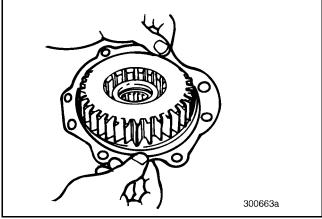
Removing Gasket from Main Drive Pinion Bearing Cover
